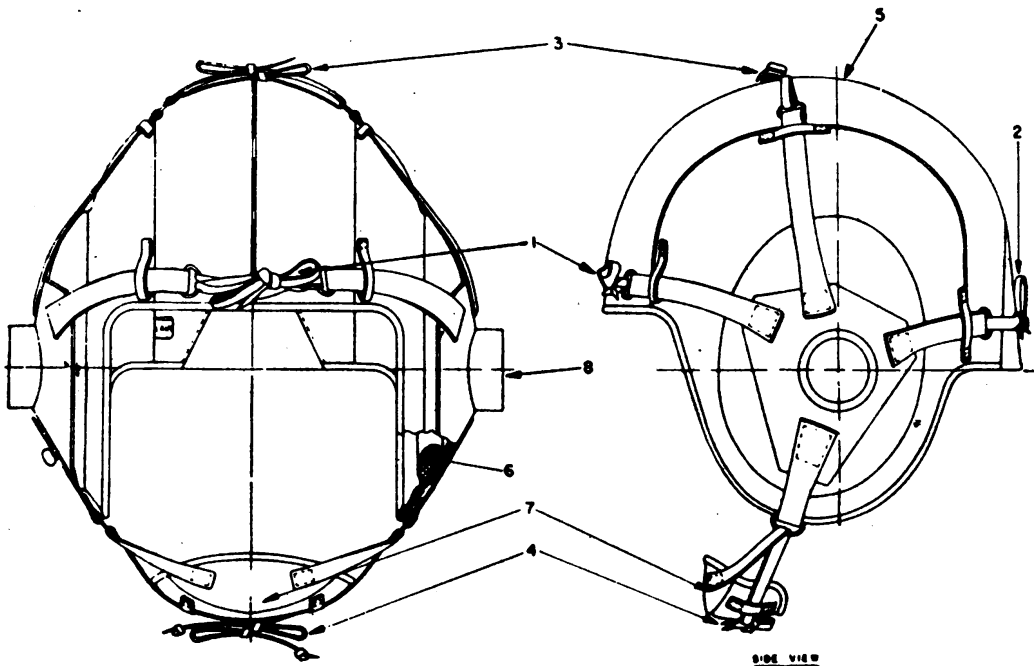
LISTENER'S HELMET (Sperry drawing No. 643904-A).
